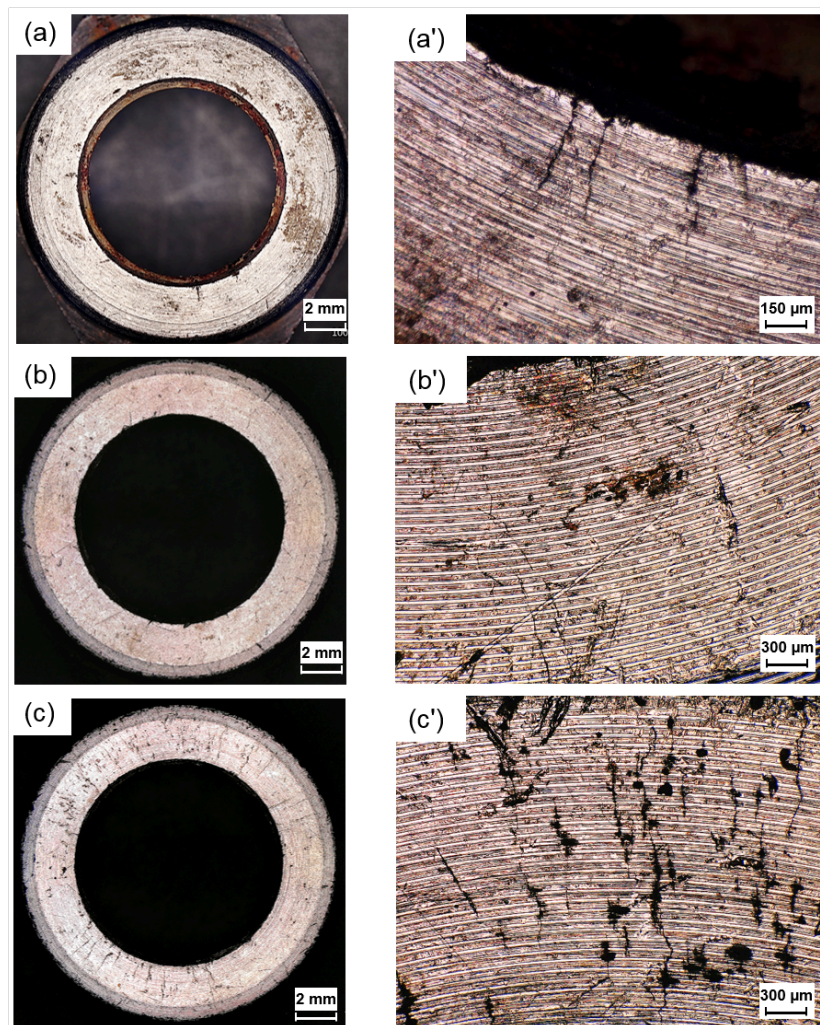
Macro- and microscale plan-view images of stress-corrosion-tested AISI316L nuts, machined by different tools. (a,a') FT1. (b,b') FT2. (c,c') SPT.
